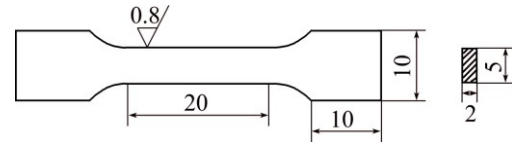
Specimen dimensions for tensile tests used in this work (unit: mm)
